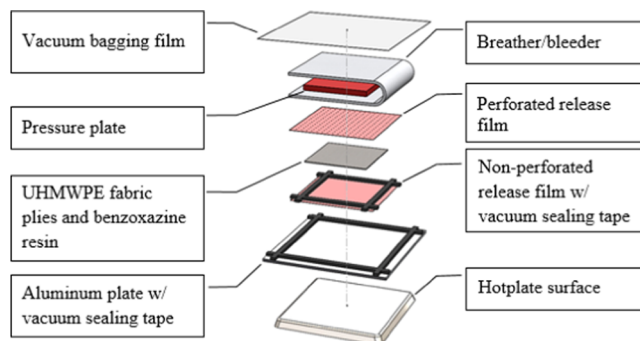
Exploded assembly drawing of the vacuum bagging mold.
